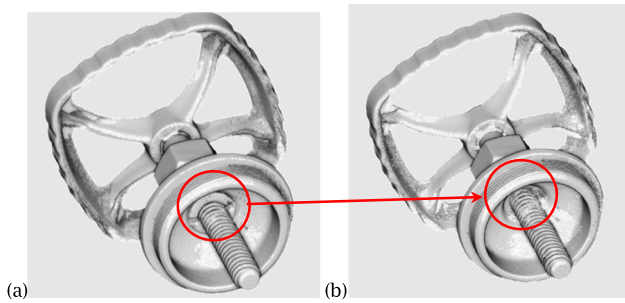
Point clouds comparison. (a) Scan of the gate valve sub assembly before the removal of its internal nut, (b) Scan of the previous sub assembly after the removal of the internal nut (see the difference between the circled areas).
